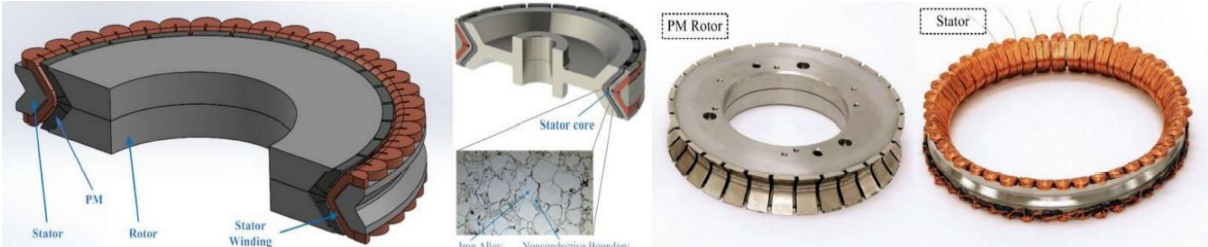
Additively Manufactured 3D-Flux PM Brushless Machine with Spray-Formed Soft Magnetic Material Core [22]
